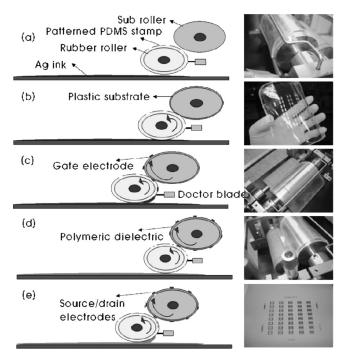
Fabrication of roll-printed OTFTs using gravure-offset printing: (a) pure and spread Ag paste onto plate (b) inking on patterned PDMS stamp using doctor blade, (c) roll-printed gate electrodes, (d) spin-coated polymeric dielectric, and (e) roll-printed source and drain electrodes onto preformed polymeric dielectric layer.
